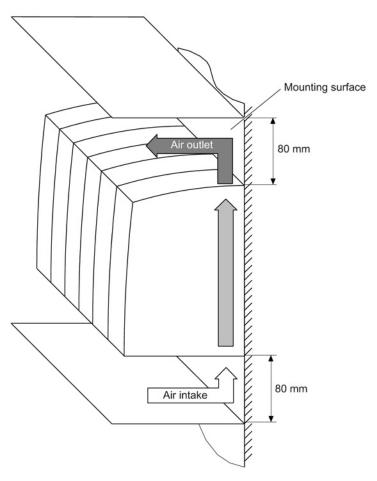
Cooling clearances for a drive line-up with internal air cooling (components up to 200 mm width)
